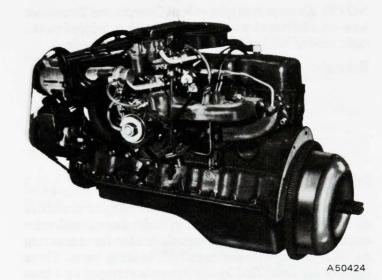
B-65 Six-Cylinder Engine Assembly—Typical
